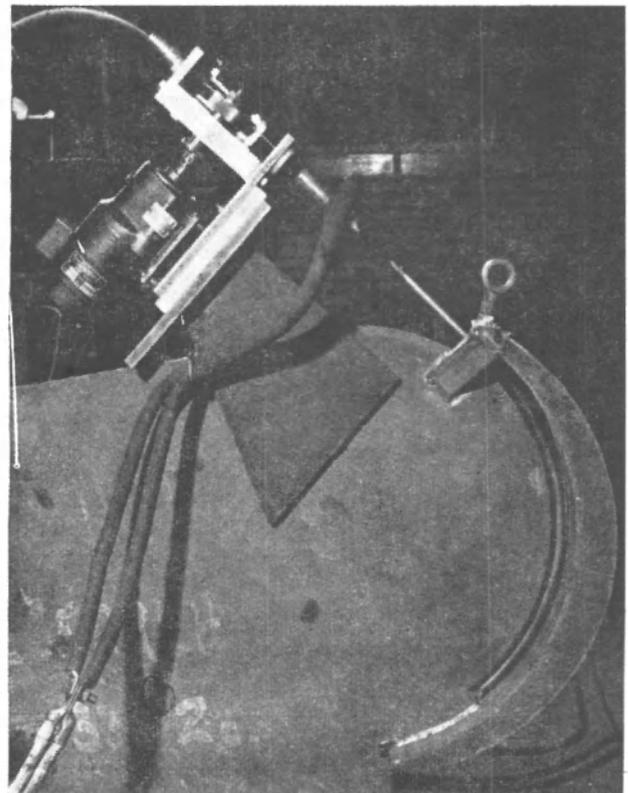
Curved Tee-Butt test weld on manipulator prior to welding.
